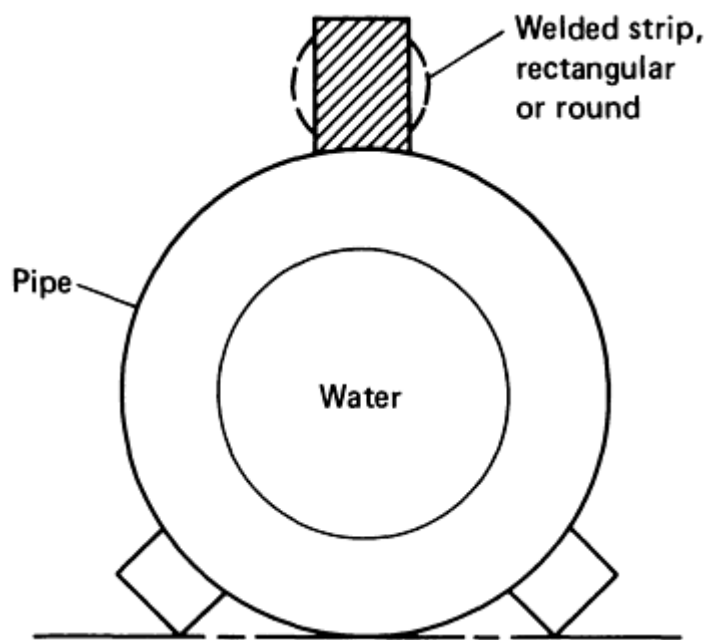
Water-cooled skid pipe with welded strips
